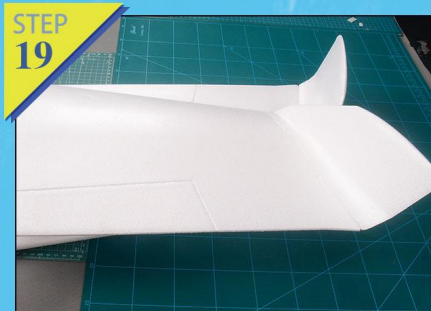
Double glue on the surface of winglet and wings, air-dry for 2mins, align with them and glue them. Cross carbon tube from fuselage and fix its position.
